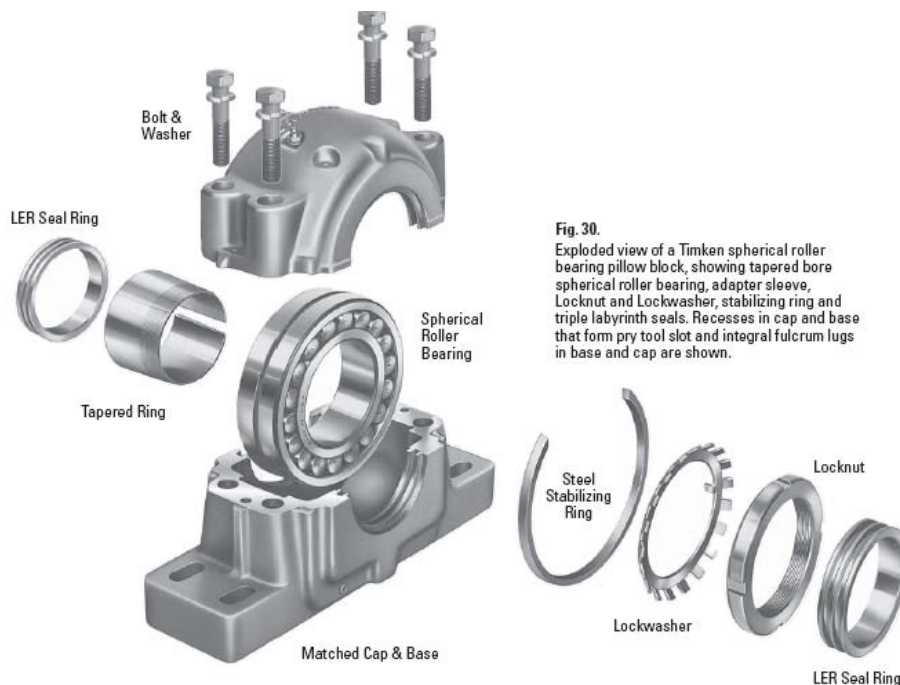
Exploded view of a Timken spherical roller bearing pillow block, showing tapered bore spherical roller bearing, adapter sleeve, Locknut and Lockwasher, stabilizing ring and triple labyrinth seals. Recesses in cap and base that form pry tool slot and integral fulcrum lugs in base and cap are shown.
